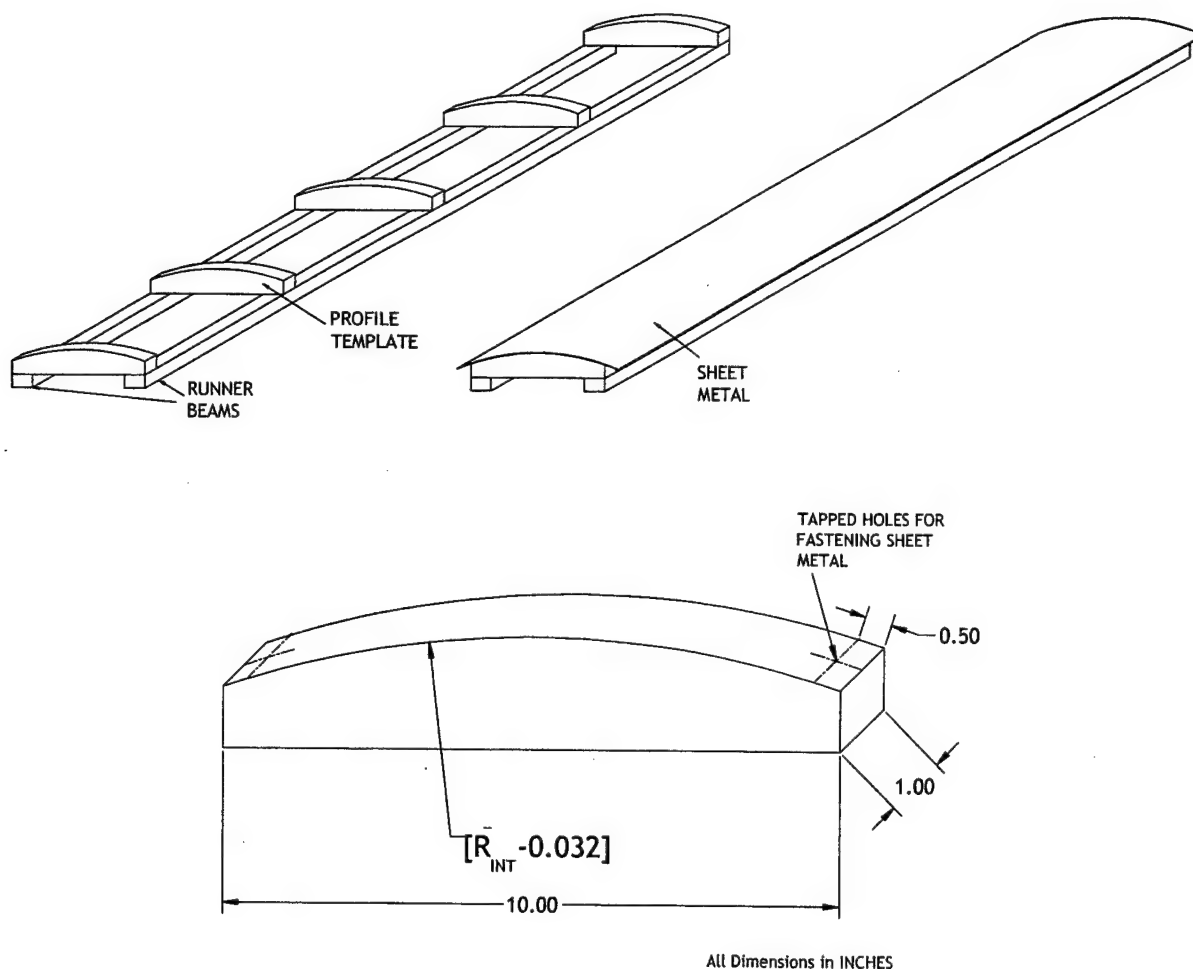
TOOLING FOR FABRICATING CYLINDRICAL SANDWICH PANELS AND DIMENSIONS OF A TYPICAL PROFILE TEMPLATE
